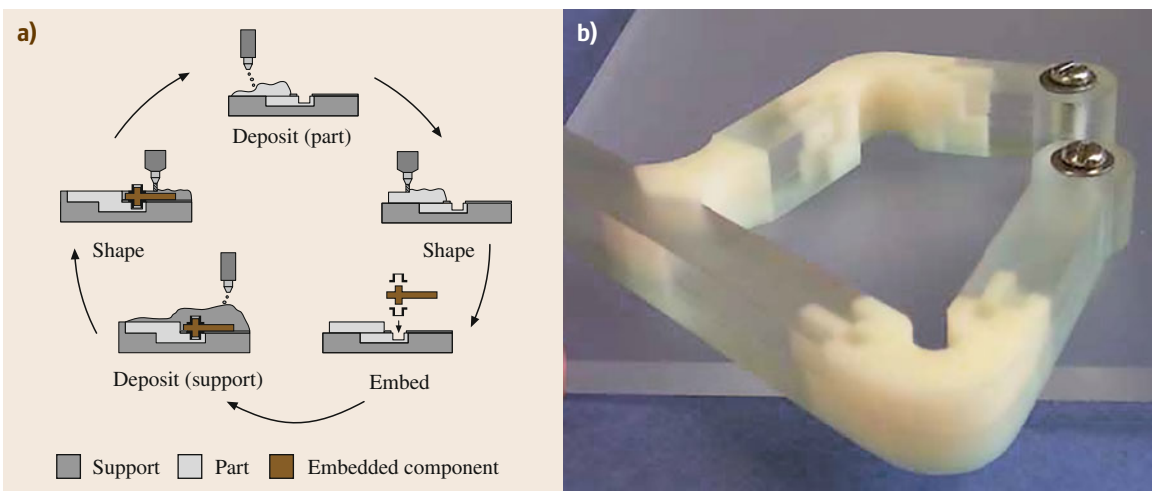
,b Shape deposition manufacturing (a) Process, (b) result of SDM process for robot mechanism design (after [23.114])
